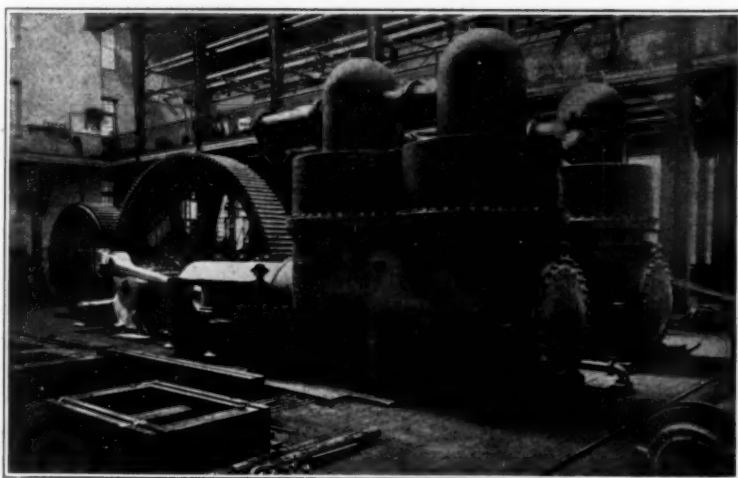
42-IN. X 60-IN. WET COMPRESSORS
